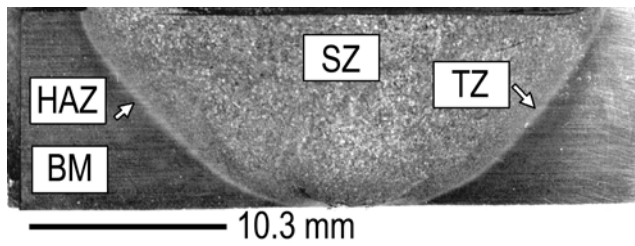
Macroscopic cross section of the 800 rpm weld with the four characteristic regions [8] of the weld indicated.
